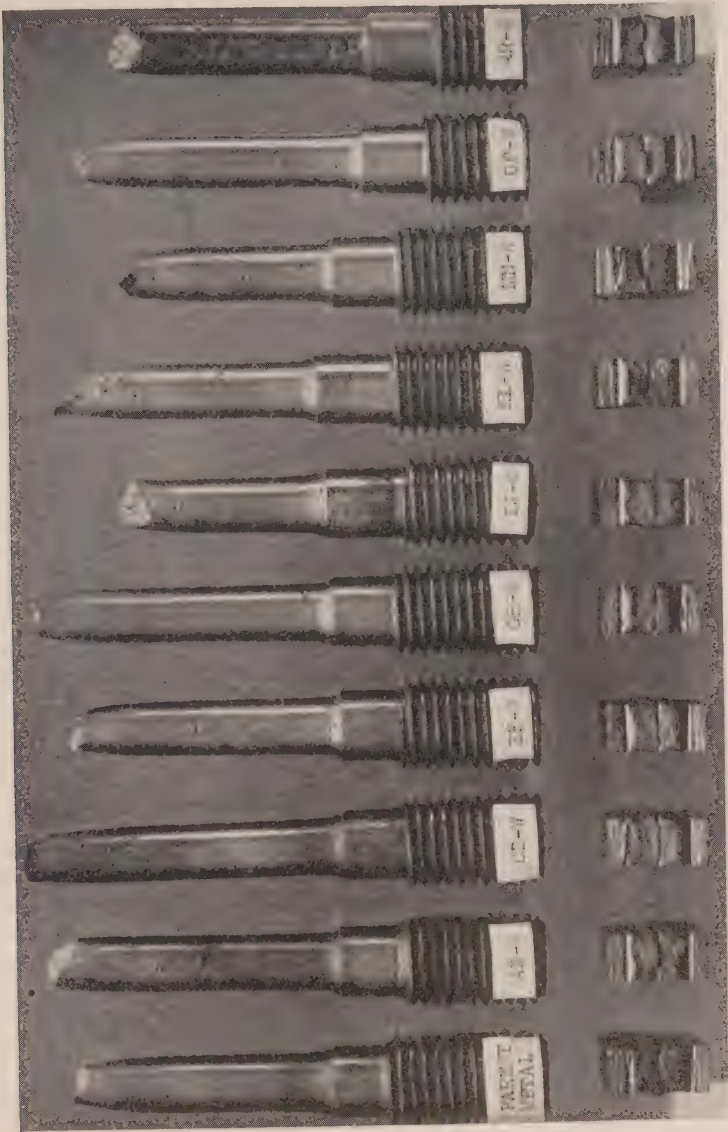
Fractured tension and impact all-weld specimens.
